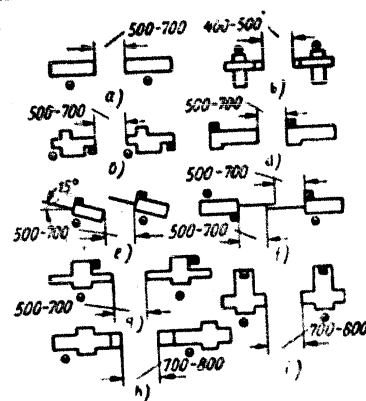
Clearance between Machine Tools Along their Line of Placement:
